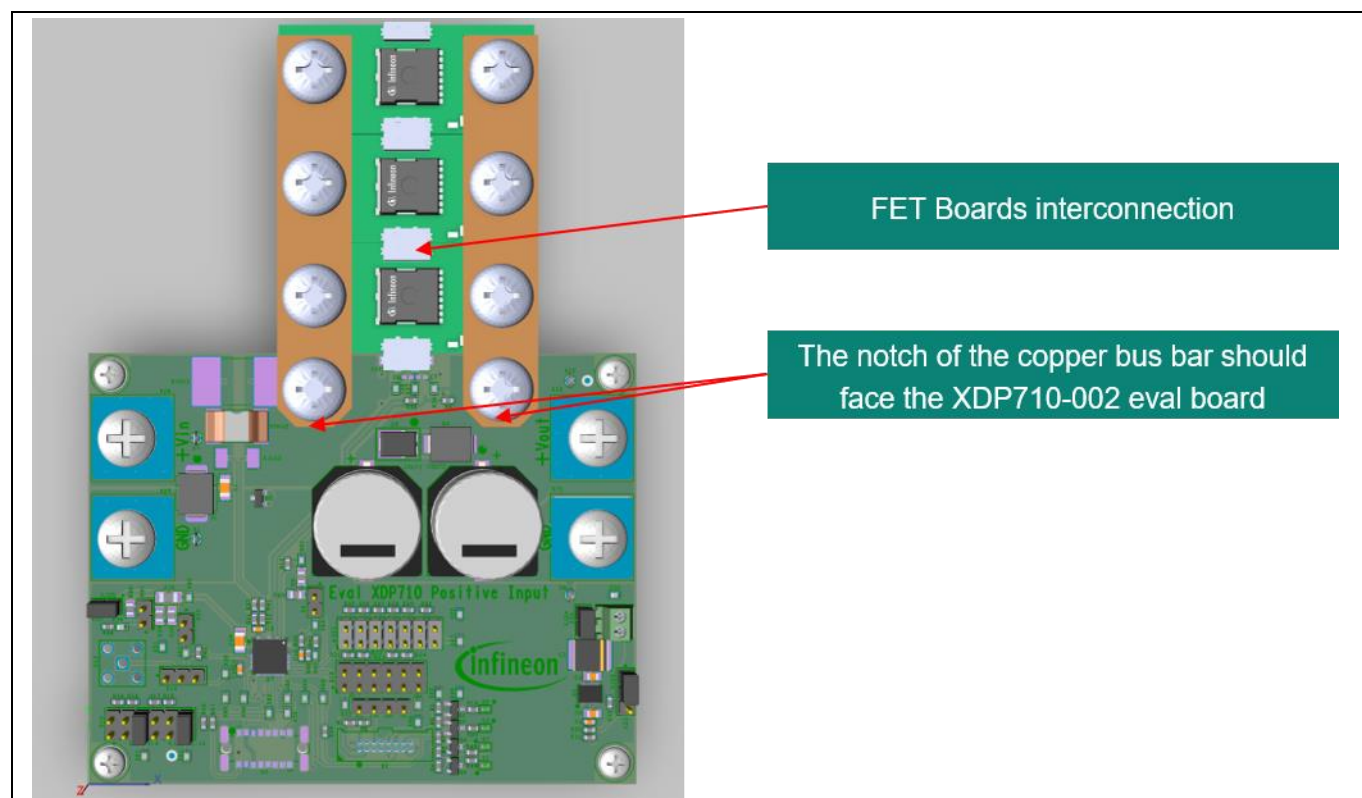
MOSFET adapter board connection with XDP710-002 Evaluation Board
